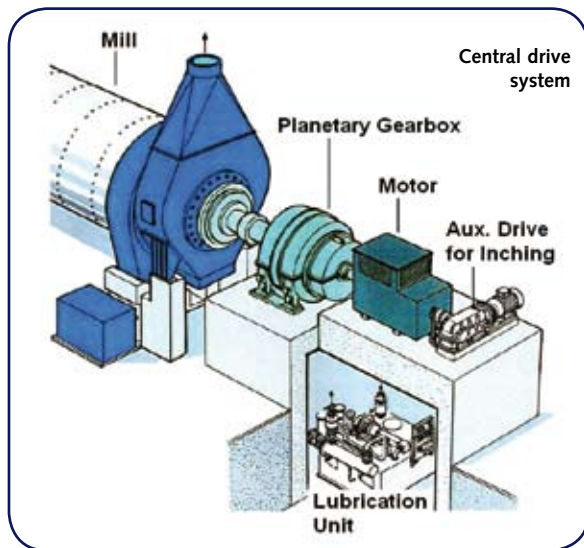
torque transfer happens through a planetary gearbox which inherently produces friction losses and requires regular lubrication to avoid premature failure. Auxiliary drive required for inching
